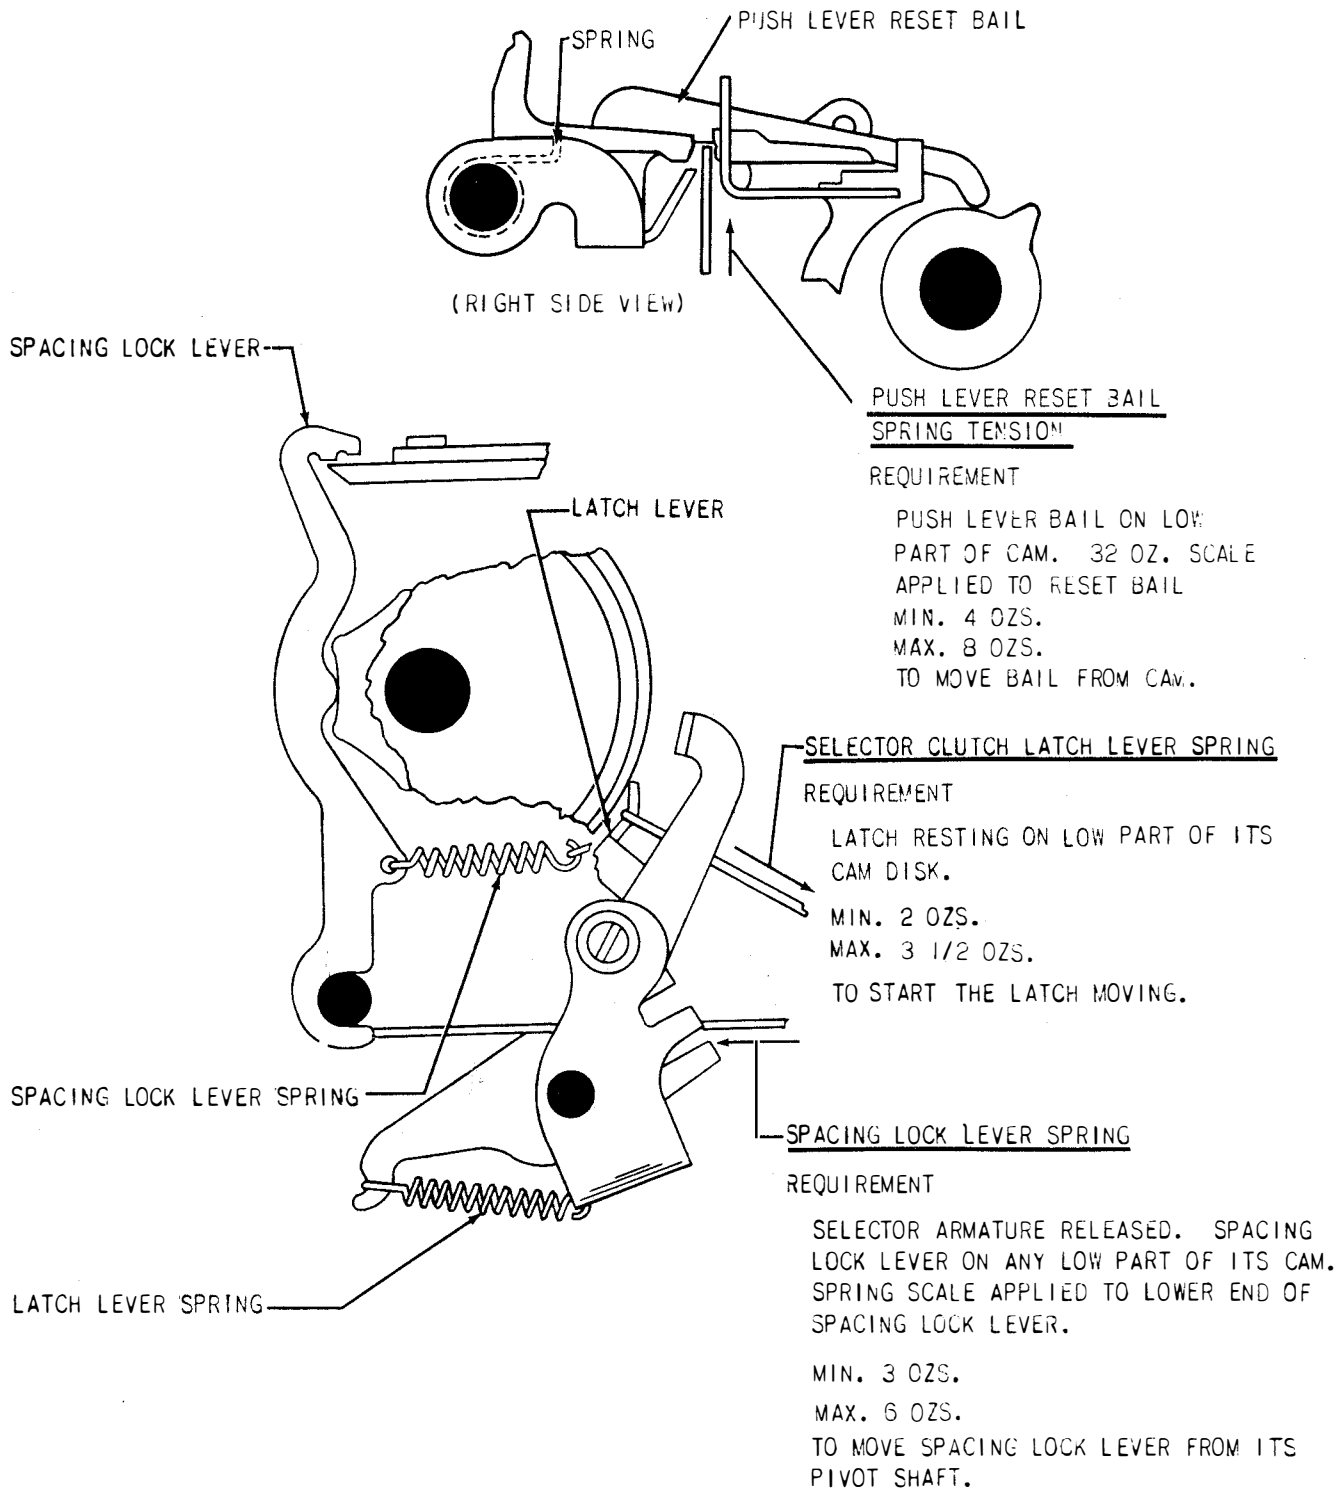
Automatic Typewriter, Selector Clutch Mechanism, Right Side View
